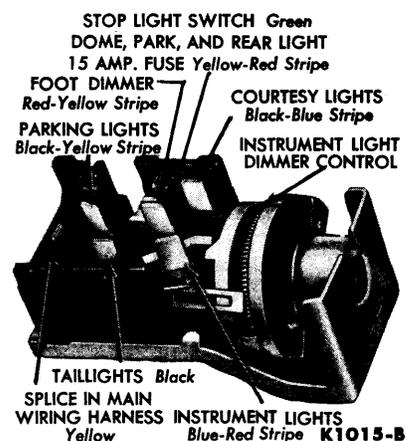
Headlight Switch, Dome Light Switch, and Circuit Breaker Assembly
